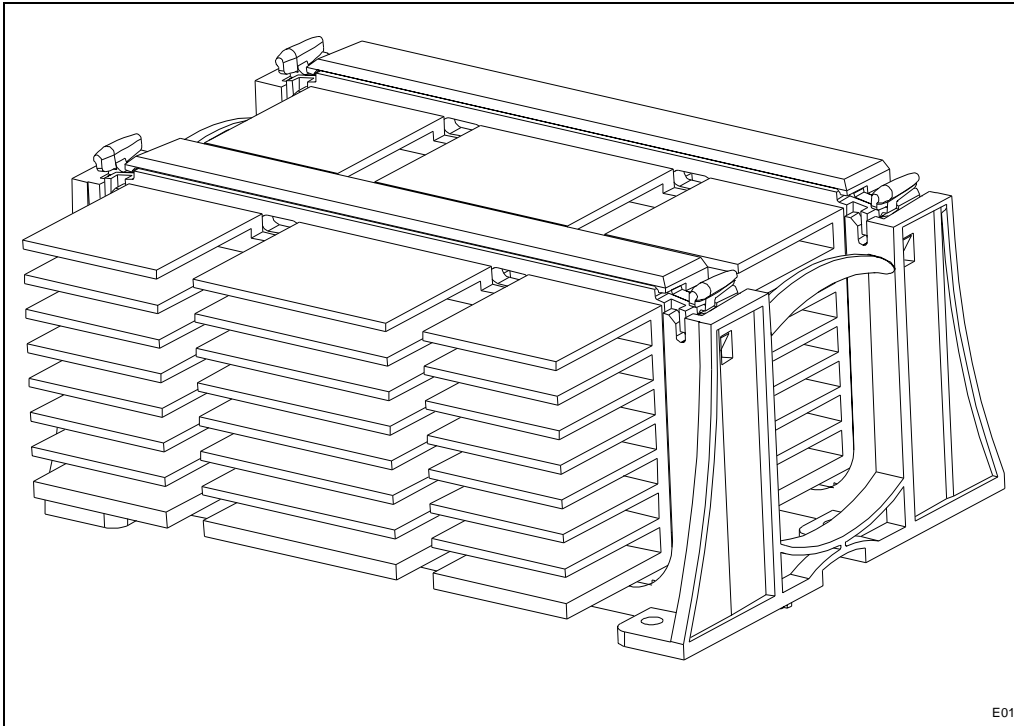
S.E.C. Cartridge Processor with All Mechanical Components,
